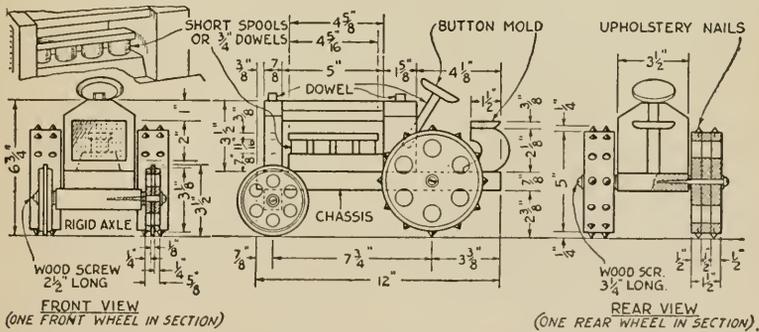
Dimensions of the tractor, and full details of front, side, and rear. Compare with the photographs of Figs. 4 and 6.
